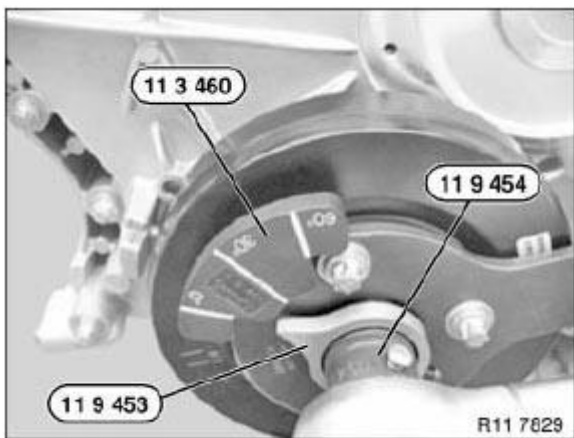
Identifying Special Tool (11 3 460, 11 9 453 And 11 9 454)
